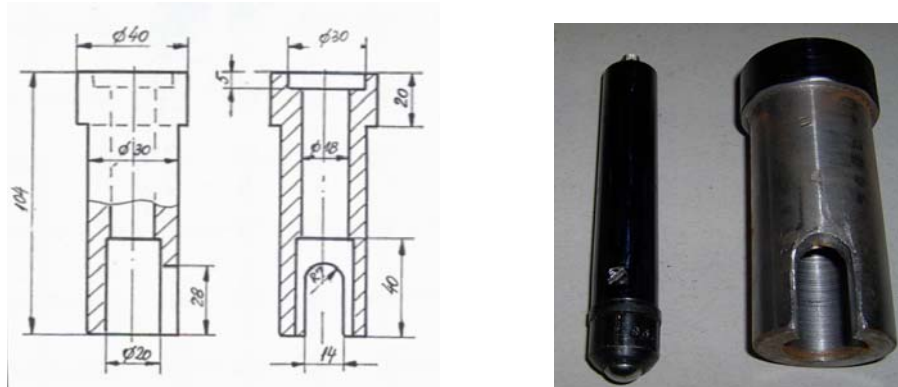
Variants penetrator rod extending rod and heat protection for flat
